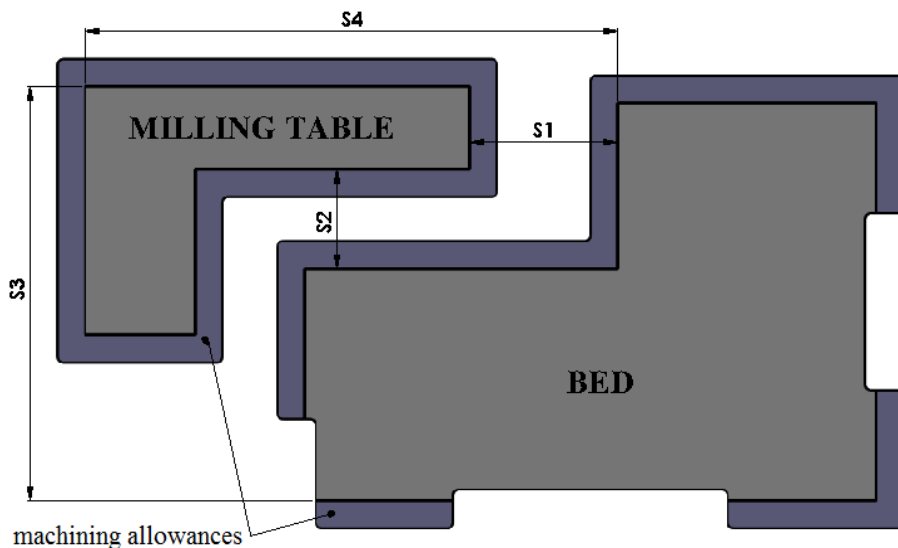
Layout of inter-connected machine tool body elements depicting selected (constant) design dimensions.
